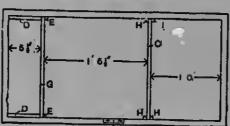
Interior Arrangement of Sea Chest (Till Removed).
